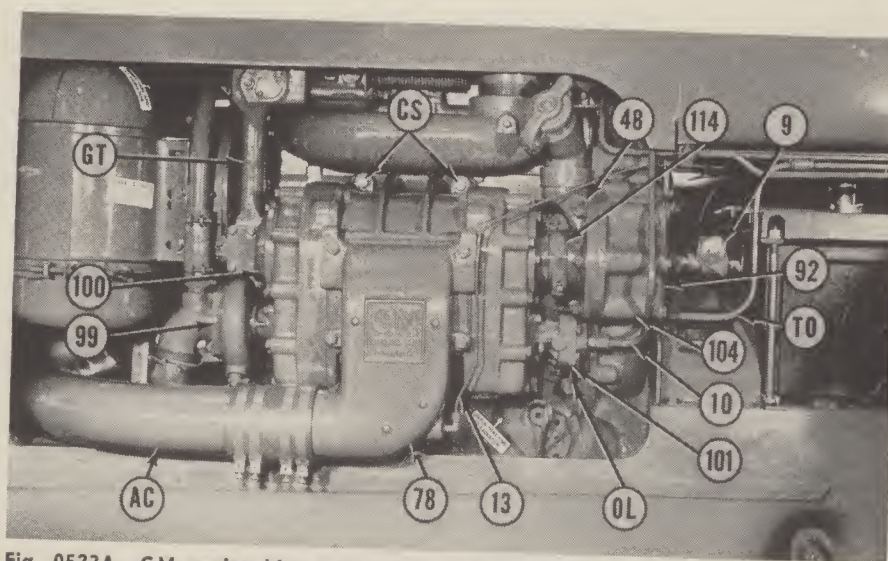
A—GM engine blower installation. On engines used in Oliver Super 99 GM tractors blower is mounted on left side of engine.
